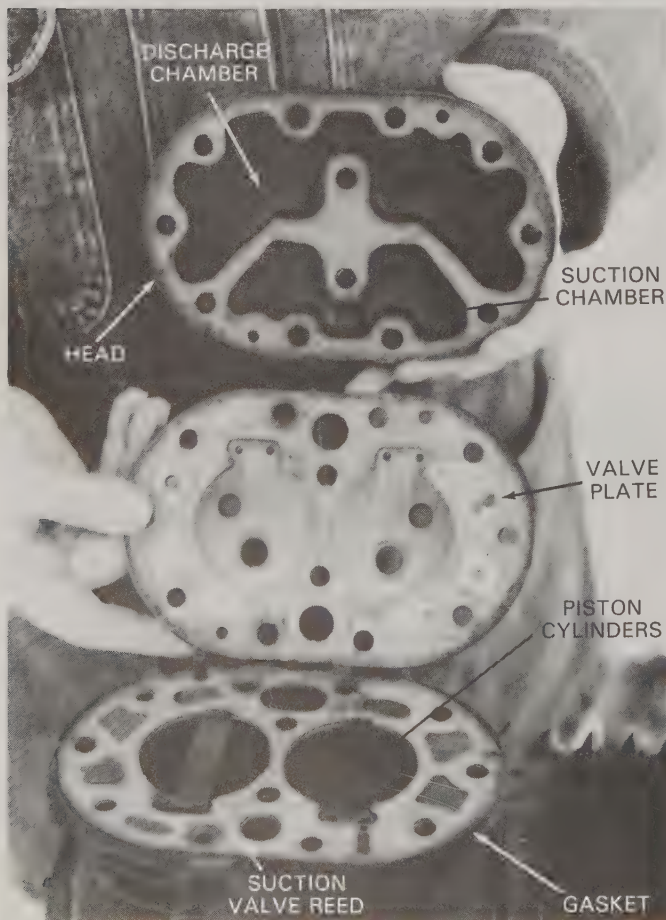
The suction valve reed is mounted beneath the valve plate or on the cylinder wall, and moves downward to admit refrigerant gas on the piston downstroke. Gaskets above and below the valve plate provide a tight seal.
